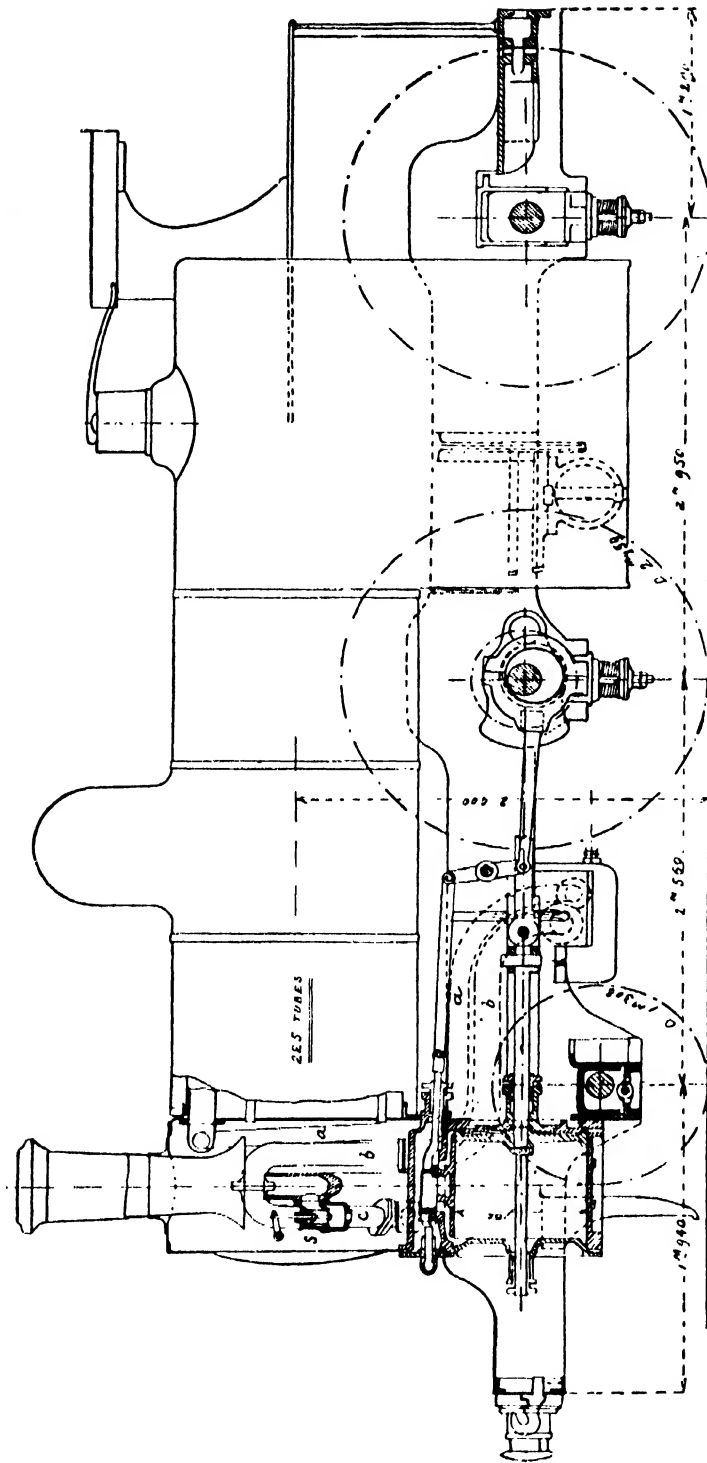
Three-Cylinder Compound Engine. Elevation
